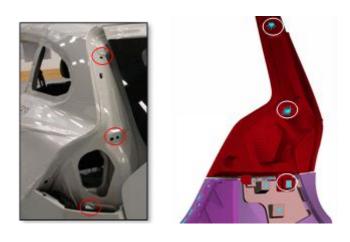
Connections between assembly parts and BIW, (A) test and (B) simulation
